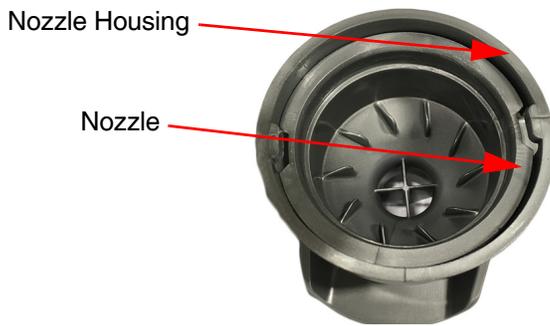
Nozzle Housing with Nozzle, Multi-brand Valve
